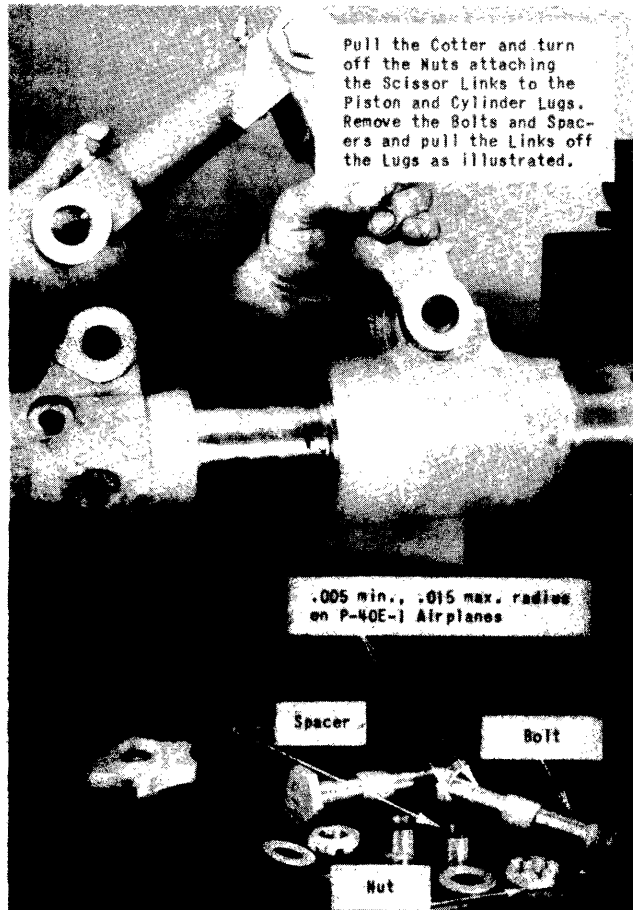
Removing Scissor Links from Piston and Cylinder Lugs
